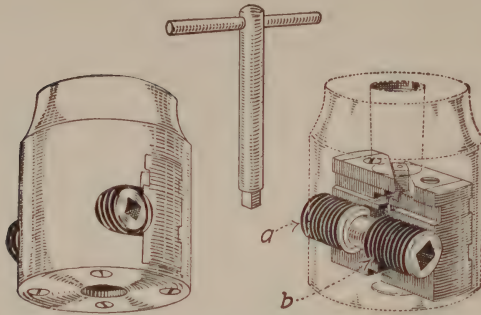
Standard type of two-jaw drill chuck. The jaws are fitted to move freely in a slot cut diametrically across the lower end of the body. The movement of the jaws is controlled by a screw arranged within the body to fit suitable threads cut in one side of each jaw. One end *a* of the screw is cut right hand while the other end *b* is cut left hand; consequently, when the screw is turned, the jaws move uniformly toward or away from each other. The clamping faces of the jaws are V-shaped lengthwise, to center the shank of the cutting tool, and notched alternately crosswise, thus fitting more or less of a distance one within the other in order to grip equally well a wide range of sizes.
